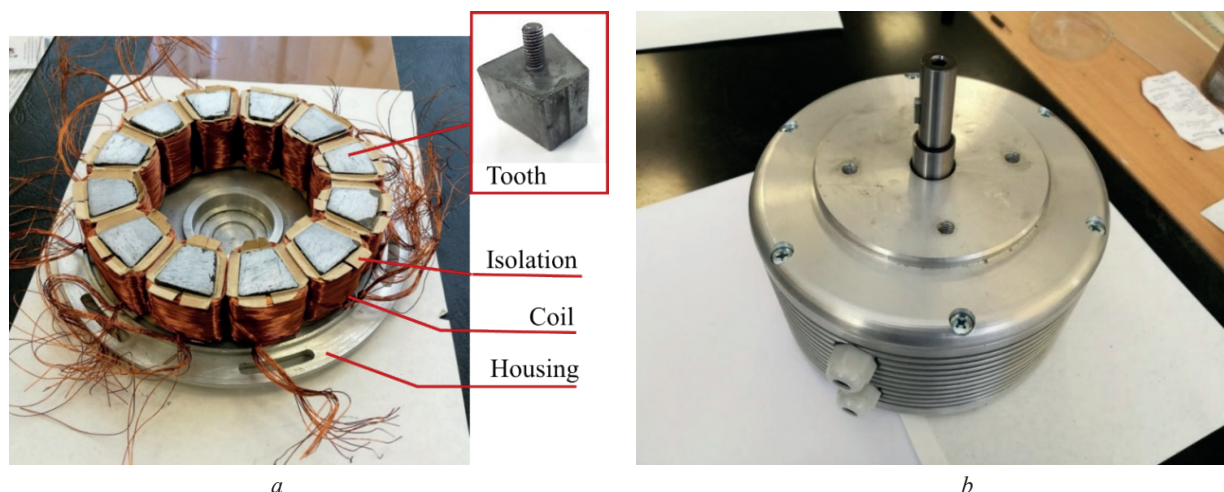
Winding motor stator (a), and the assembled electric motor (b)
